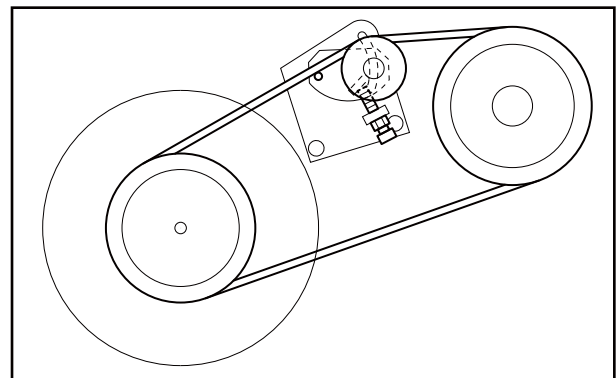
Belt Tension (Sea-Water Pump Side) - Adjust
